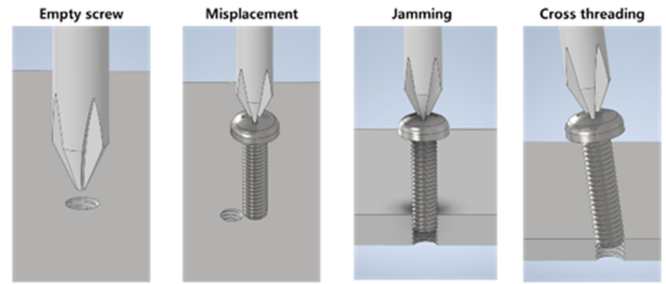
Bolt assembly failures (From left to right: empty screw, misplacement, jamming, and cross threading)
